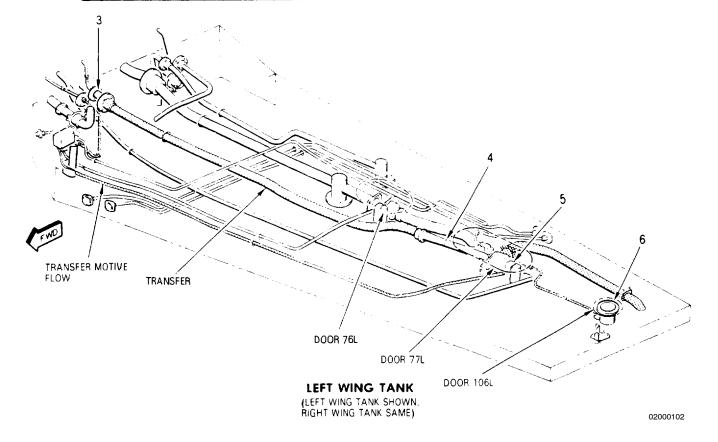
Wing Fuel Transfer System Component Locator (Sheet 2)
